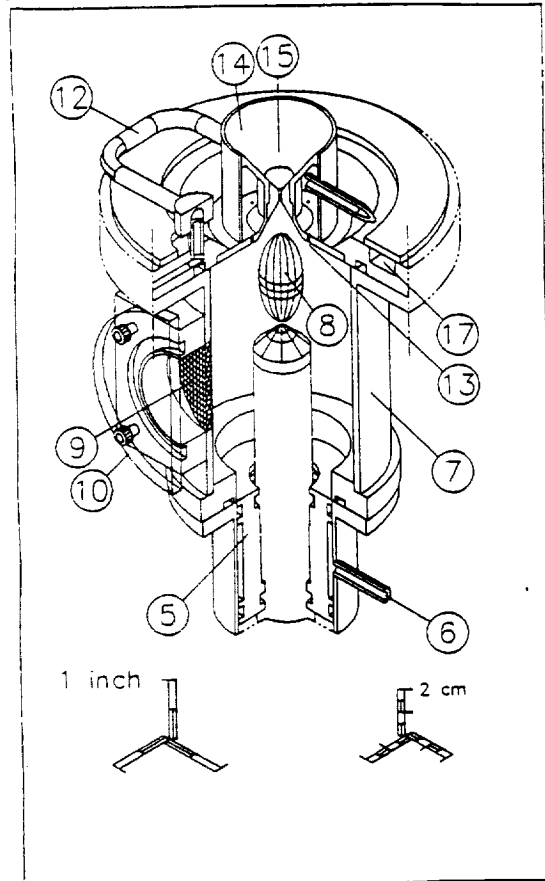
Enlarged isometric view of the the coaxial MET with the vacuum flange and matching circuit removed.
